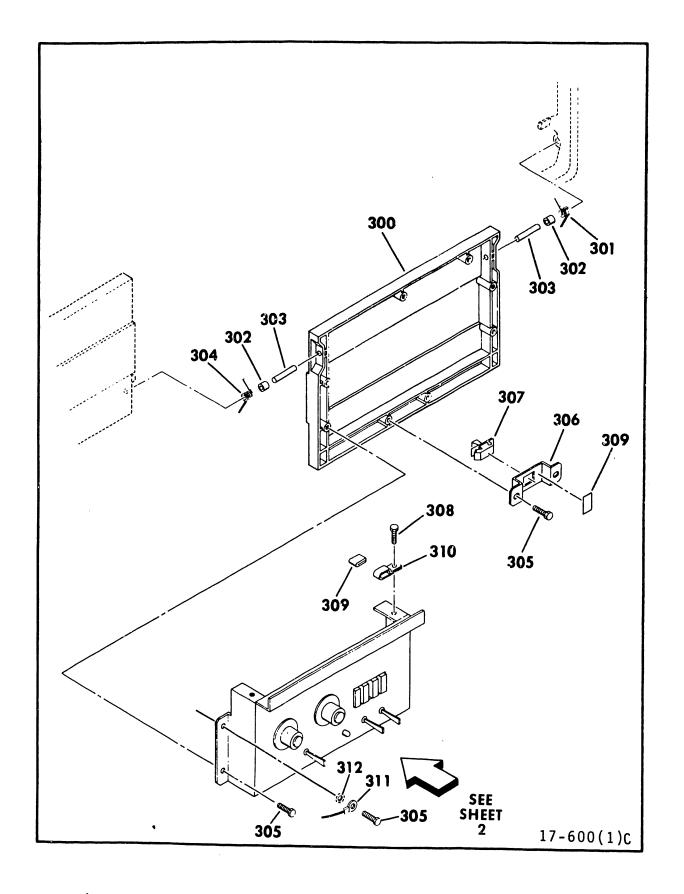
A-6. Diagnostic Panel Assembly (Sheet 1 of 2)
